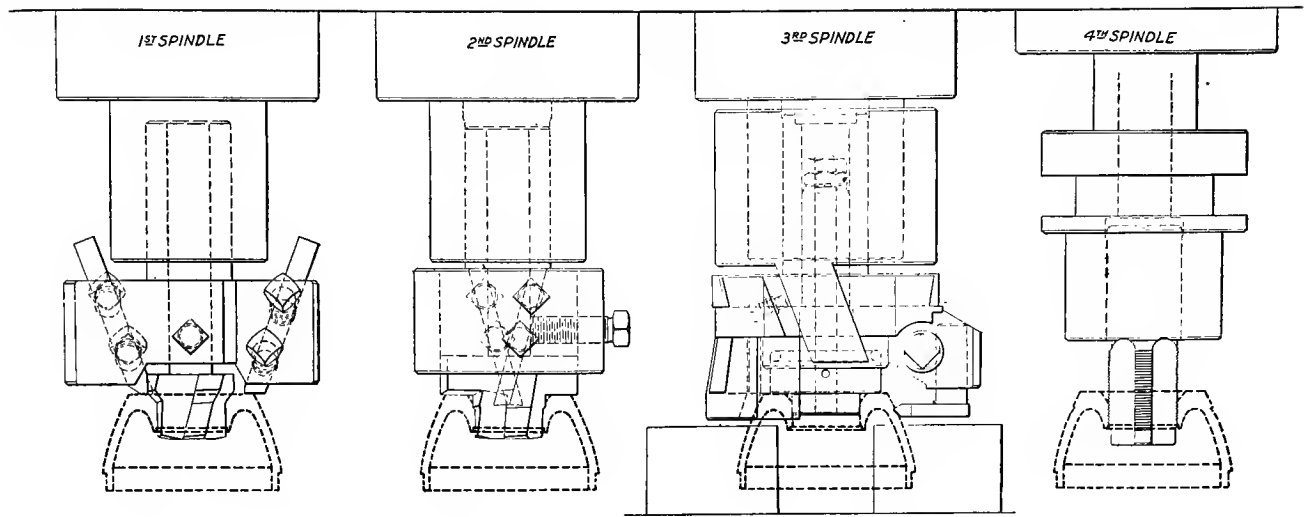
TOOLING FOR MACHINING FUSE HEADS
